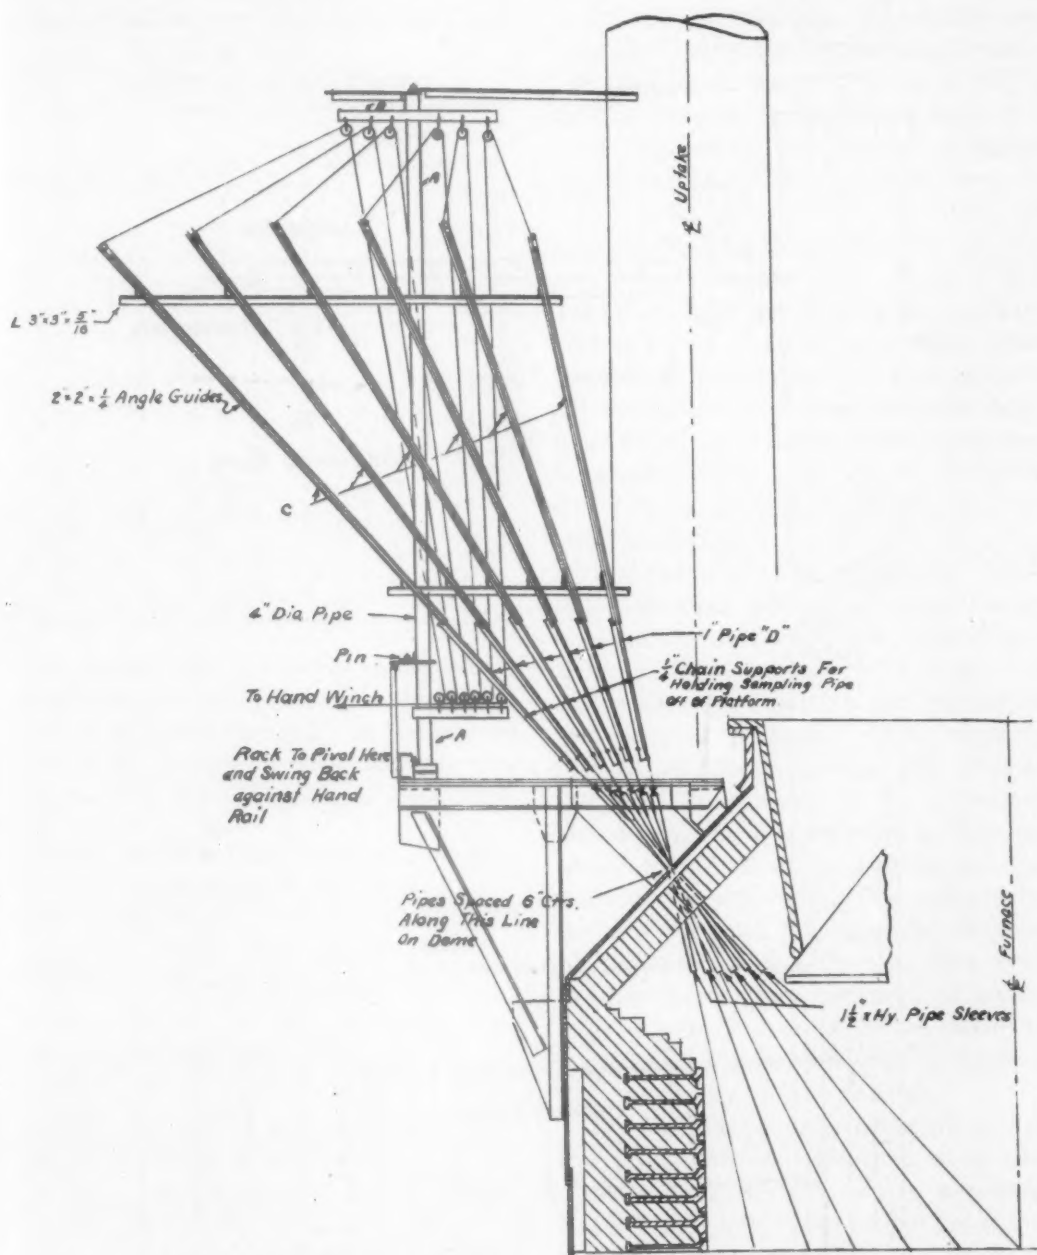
SECTIONAL ELEVATION SHOWING GAS-SAMPLING PIPE RACK.
